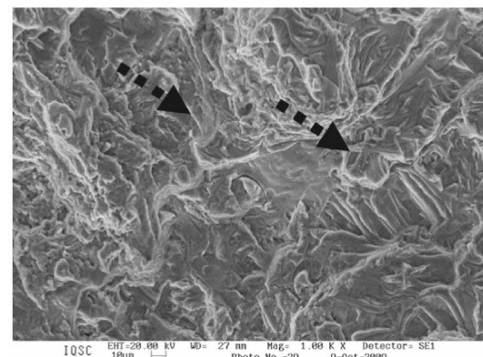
shows the fracture surface of a specimen tested for fatigue at 280 °C under dwell cycles and load control. Crack propagation was mainly due to creep, with dimples appearing extensively at the crack front during dwell. Since a crack starts propagating at a relatively low  $\Delta K$ , diffusion creep may have occurred in this case. As the crack grows,  $\Delta K$  rises, and crack growth quickly accelerates.
